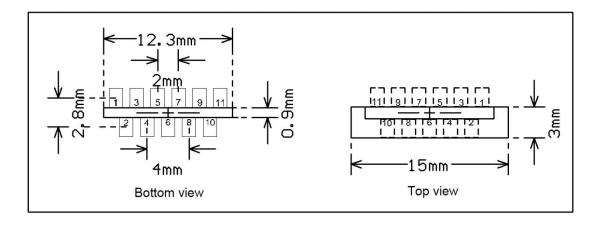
Top and bottom views of the PCB to which WBR2 applies
